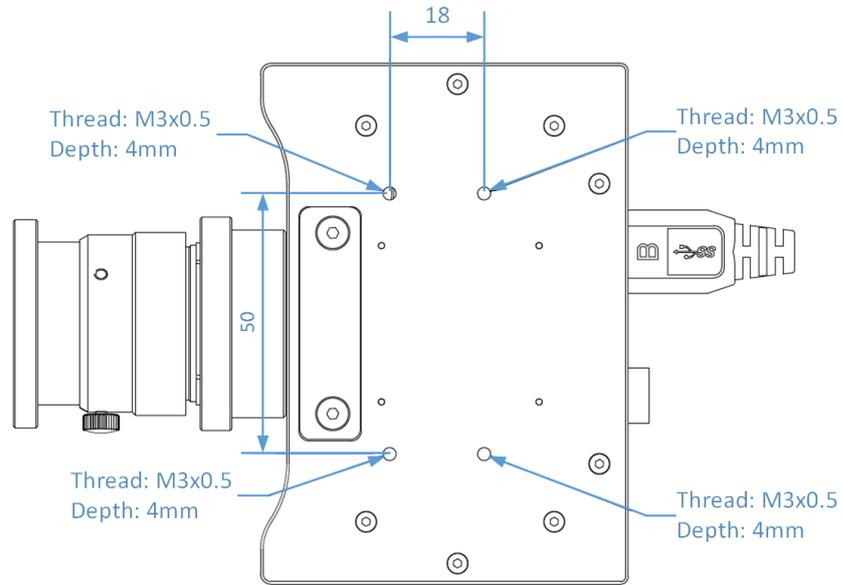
Bottom view of the snapscan camera showing the 4 mounting holes (all dimensions are in millimeter)
